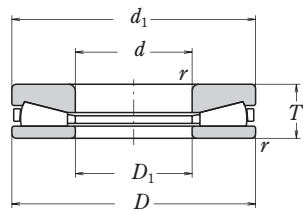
Thrust Tapered Roller Bearing in Heavy Duty Extruder
